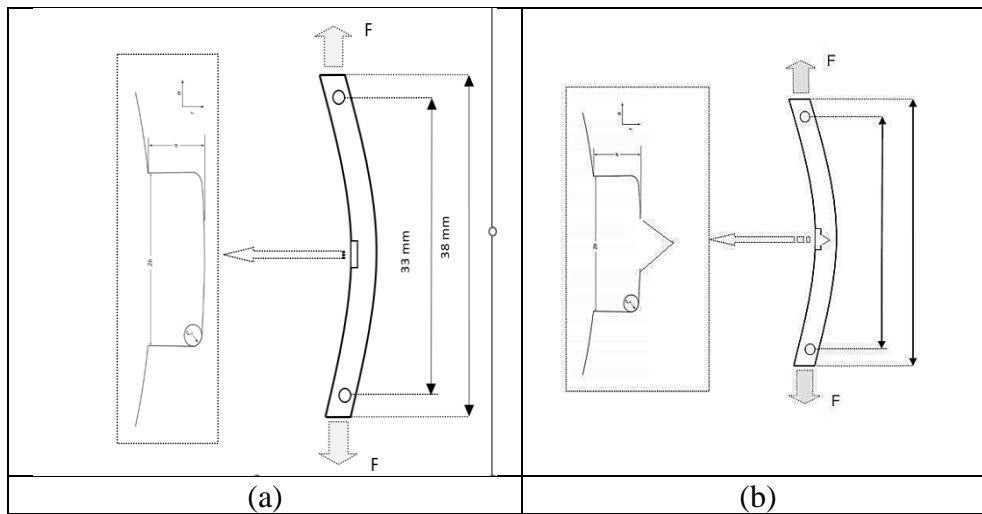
Sketch of type C samples with defects: (a) "bearing pad" type, (b) complex type ("bearing pad with debris fretting").
